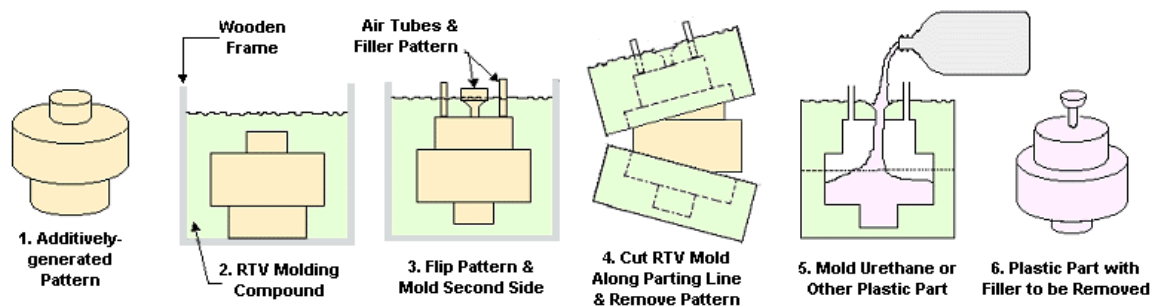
| Last steps in the process of vacuum casting with silicone mold
